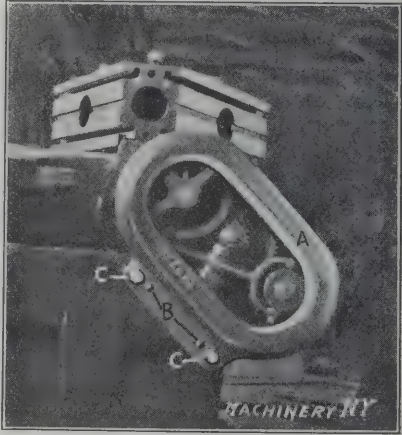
Turret Lathe Indexing Mechanism shown in Detail in Fig. 1, Assembled
